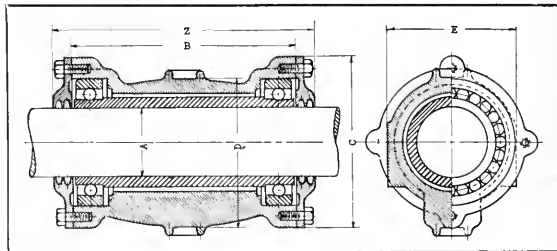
Cross-sectional View of the Fafnir Bearing Box
